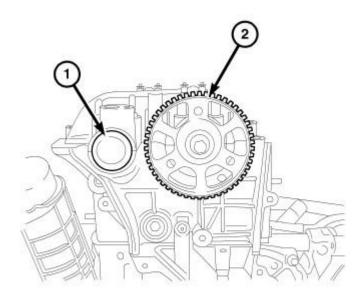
Camshaft Oil Seal Installer Courtesy of CHRYSLER LLC
